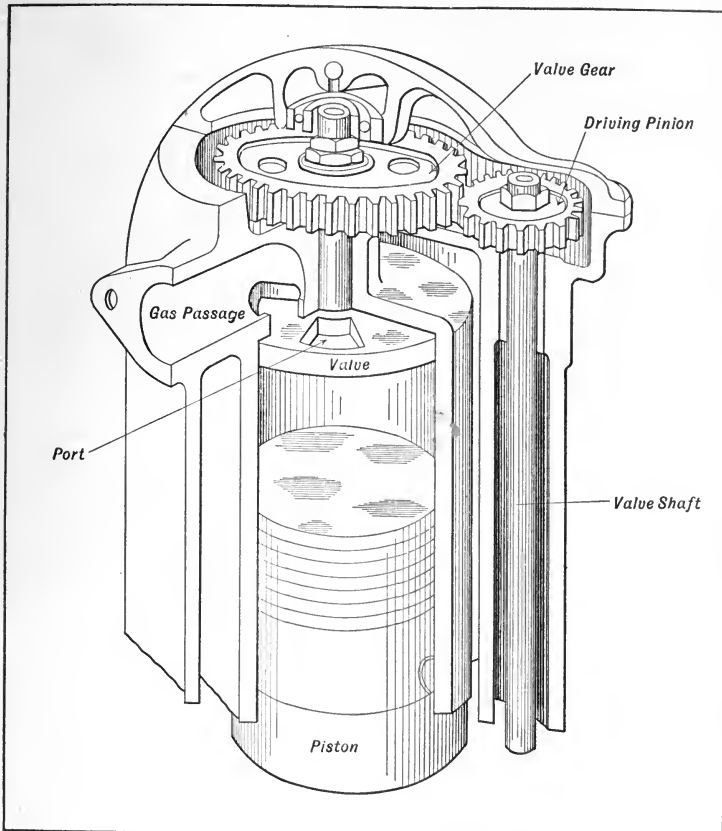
Partial Section of Reynolds Rotary Valve Motor Cylinder, Showing Method of Rotating Simple Disk Valve and Ports in Cylinder Head.
